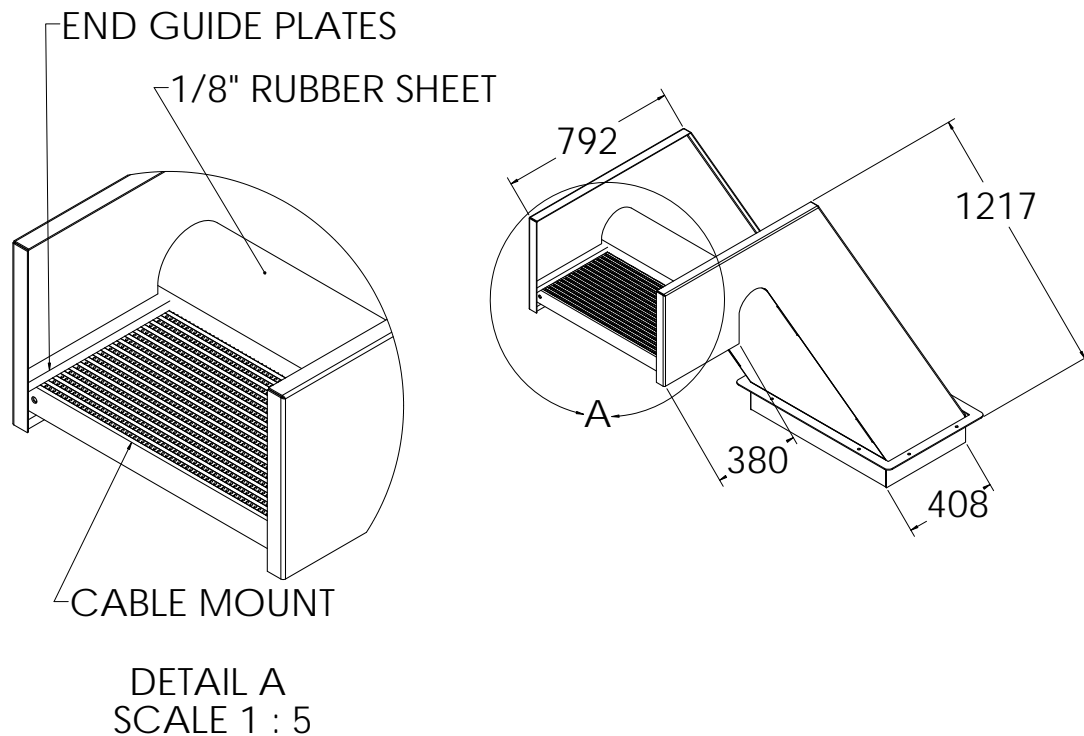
Cable riser isometric view showing cable light and gas seals
